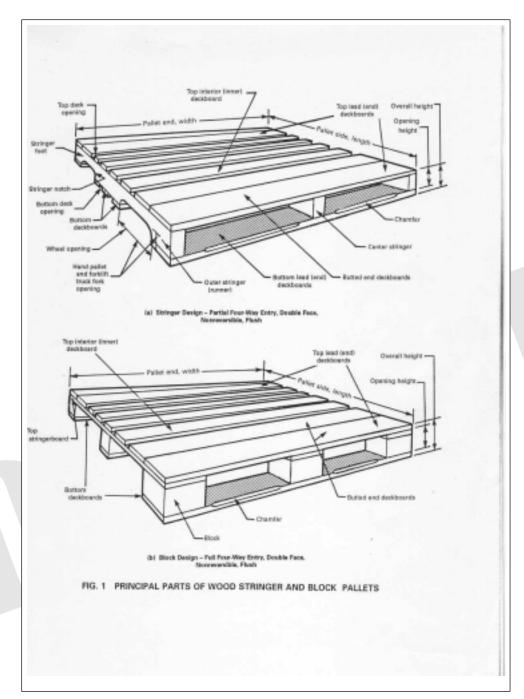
(above): Principal Parts of Wood Stringer and Block Style Pallets
